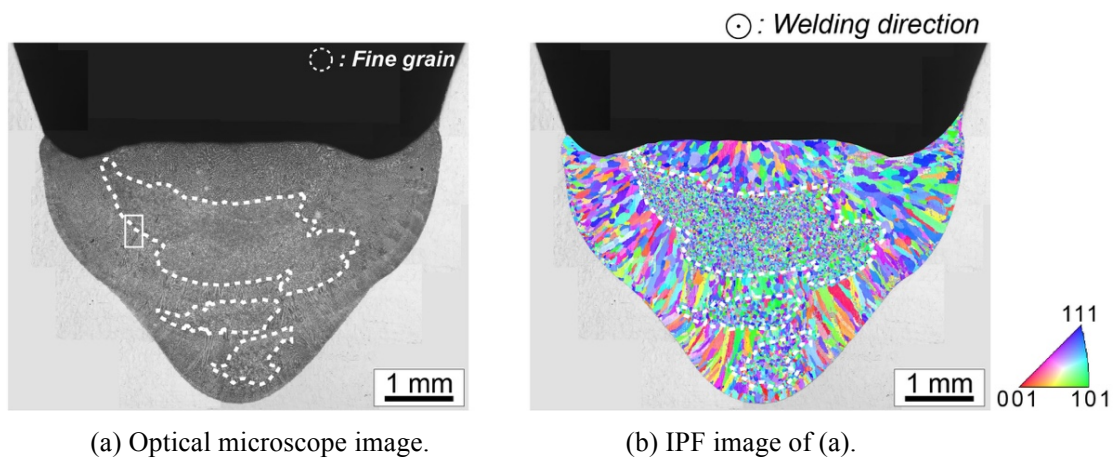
Cross-section of weld bead by using hot-wire GTAW process, EBSD analysis result of the weld bead and positions of fine equiaxed microstructure into the weld bead.
